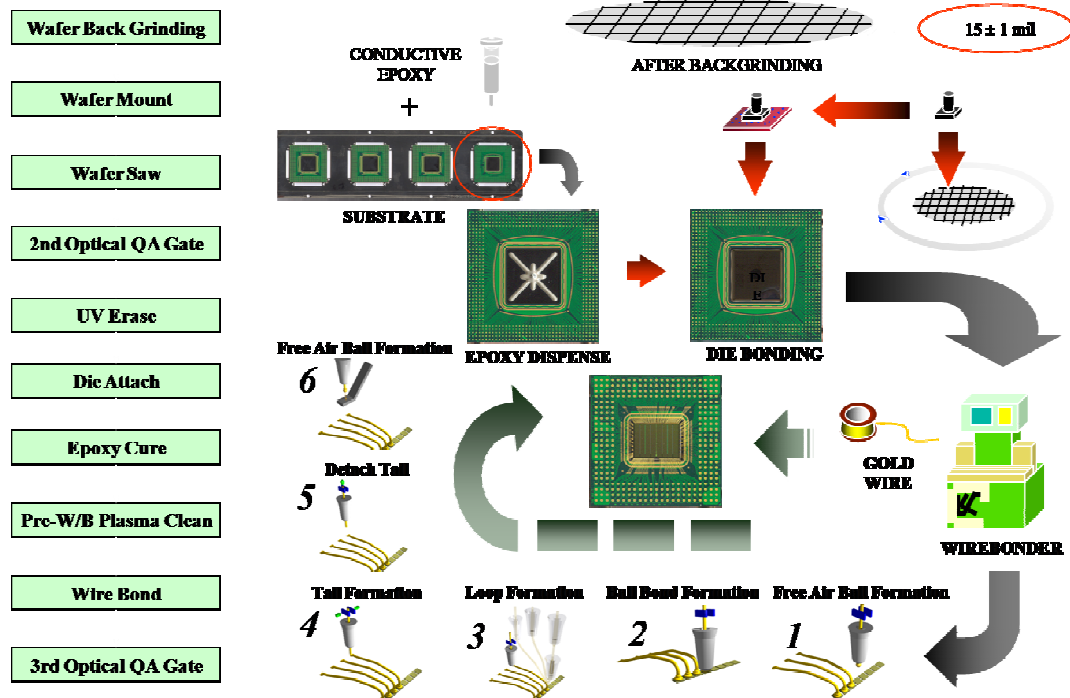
TEBGA package assembly process flow-Part I [ASE, 2004]
